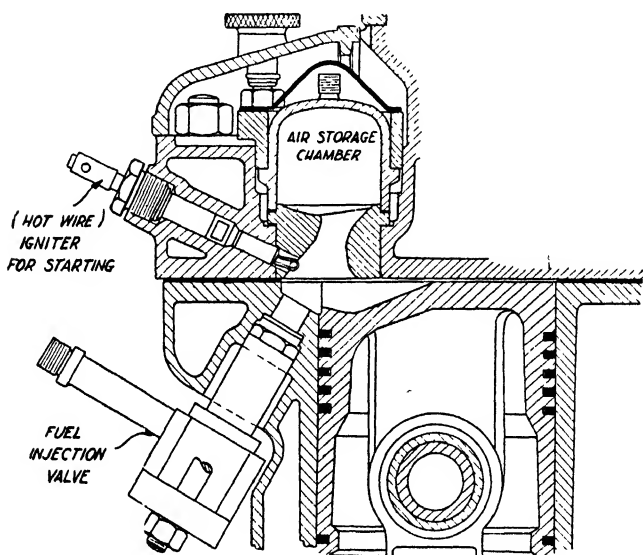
COMBUSTION CHAMBER OF ACRO-TYPE SAURER ENGINE.
